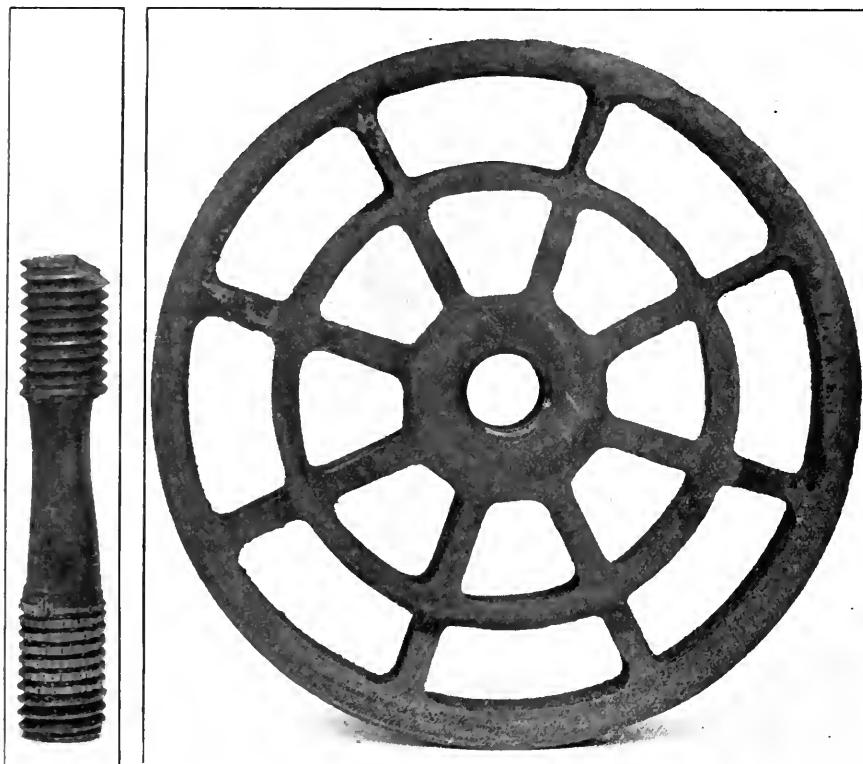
VALVE STEM AND SEAT, SHOWING THE DEGREE OF WASTING AWAY
